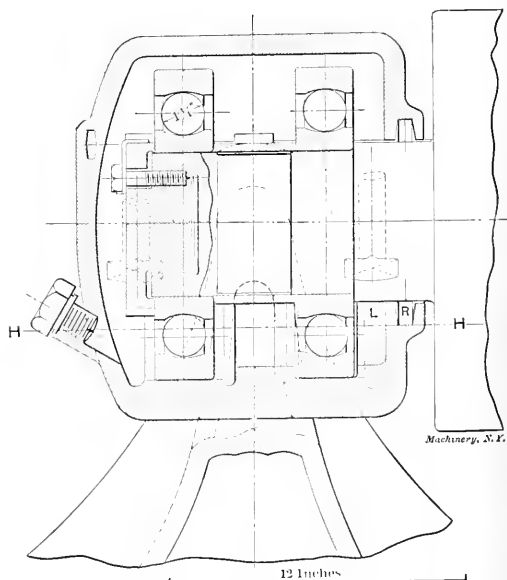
Equalized Ball Bearing applied to Calender Roll.
